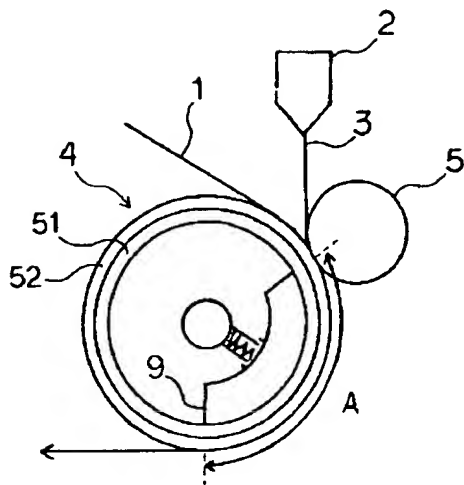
Explanatory drawing showing the embodiment of a gas injection.
